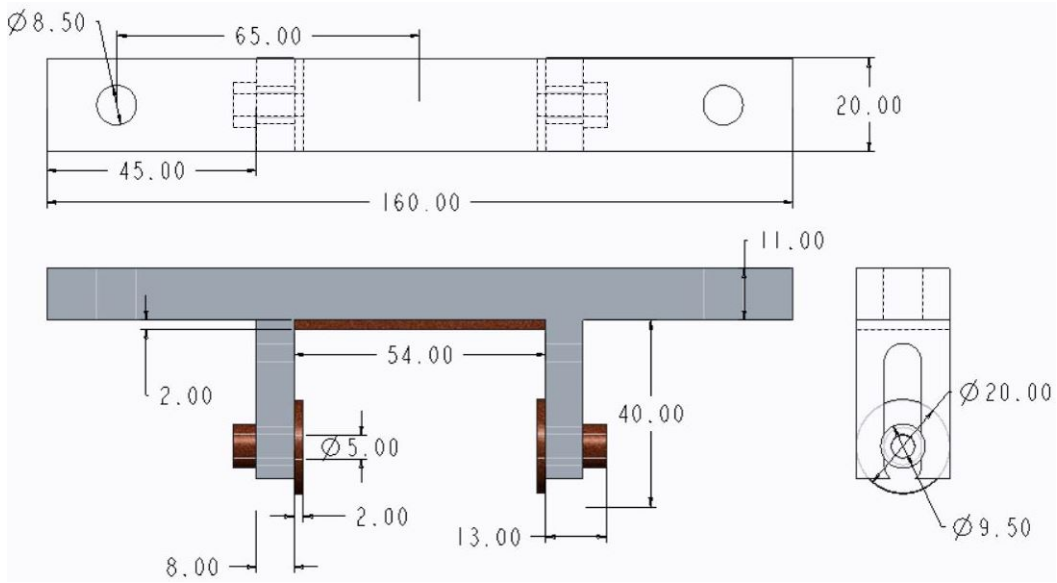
Top tool holder with bakelite insulation shown in brown color (dimensions are in mm)
